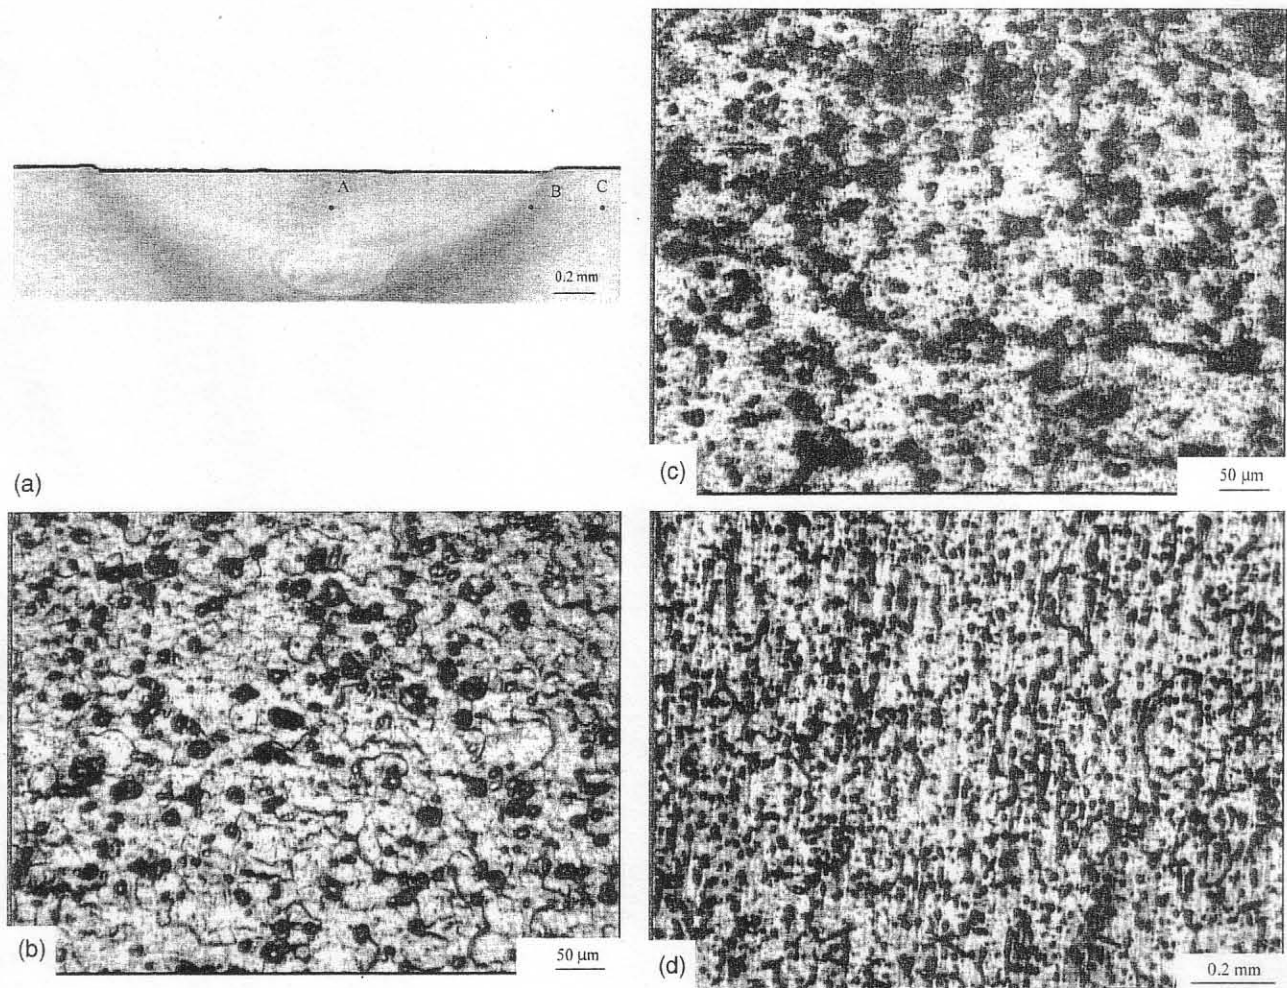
Typical features of friction stir welded 6061-Al alloy; (a) weld cross section perpendicular to the welding direction; (b) equiaxed grains in the nugget zone around the position A; (c) heat-affected zone (HAZ) around the position B; (d) unaffected 6061-Al alloy in the position C.
